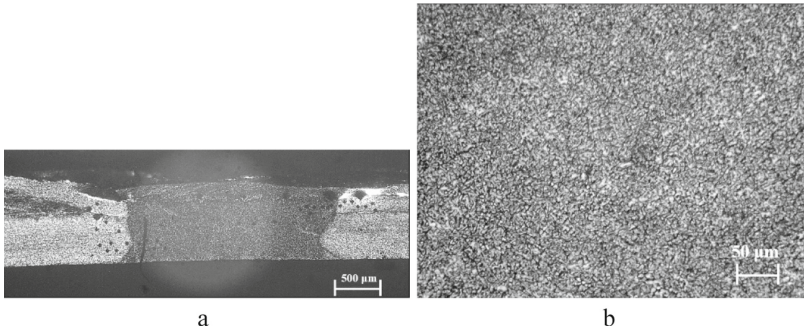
Microstructure of welded joint produced by argon-arc spot welding (a) – general view; (b) – structure of weld metal on the fusion line.
